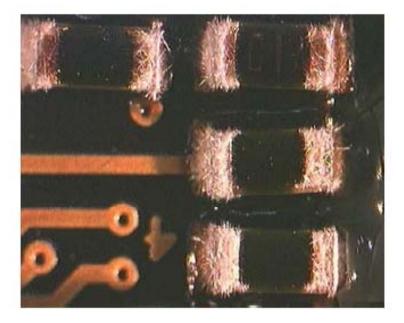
Close-up showing tin whiskers on the solder joints. 40×
